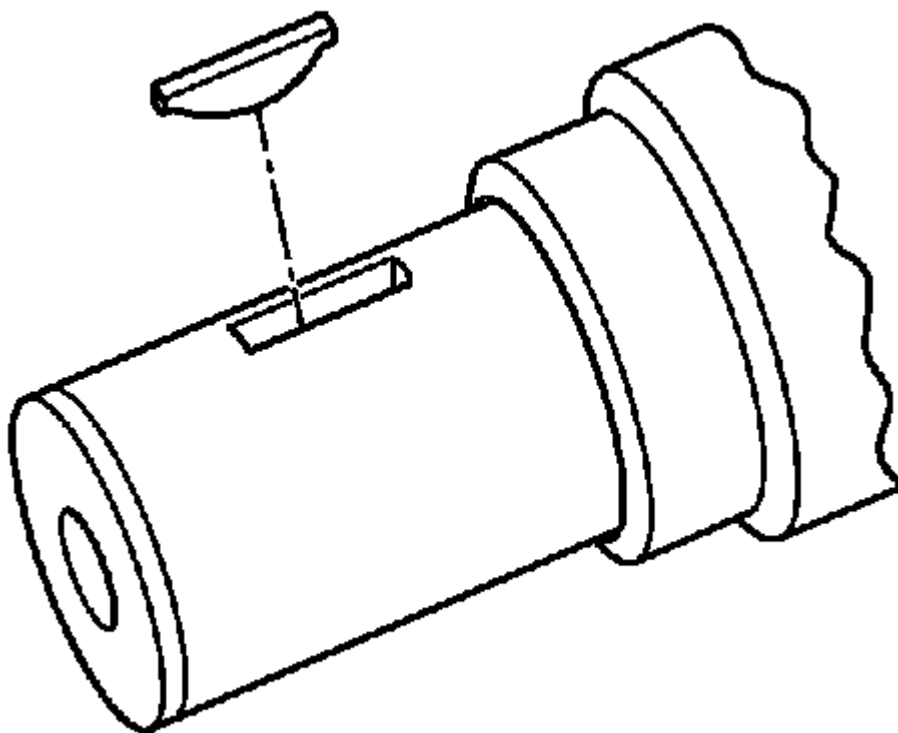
View Of J 38416-2 In Nose Of Crankshaft
